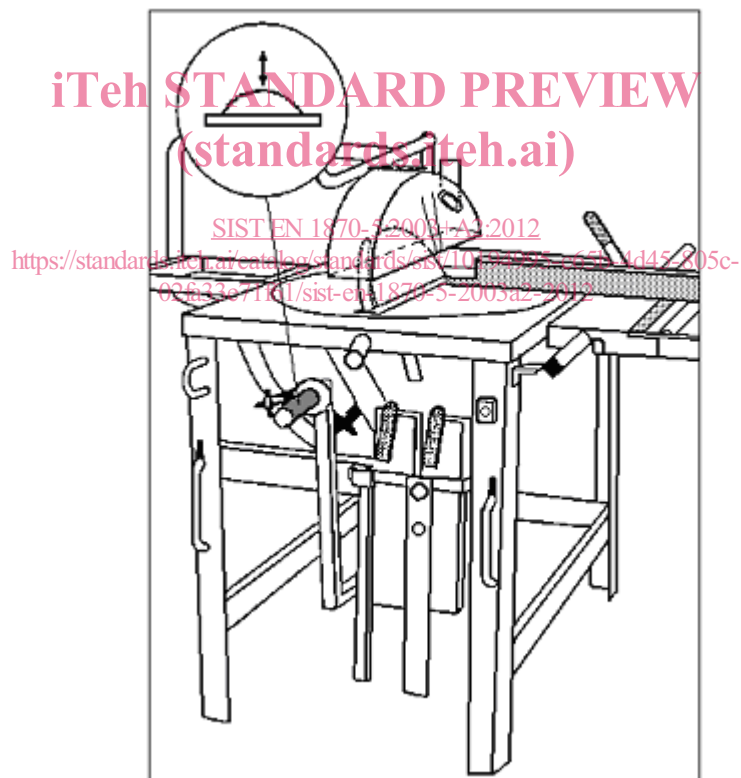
Example of a machine in the cross-cutting mode with stationary workpiece
